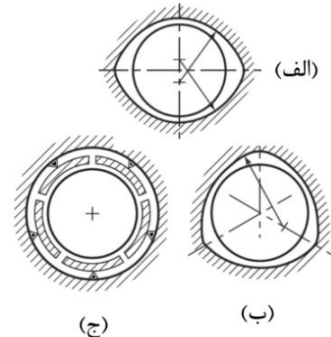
Non-circular bearings: (a) Double angular bearing; (b) Triangular bearing; (c) Tilting pad journal bearing
